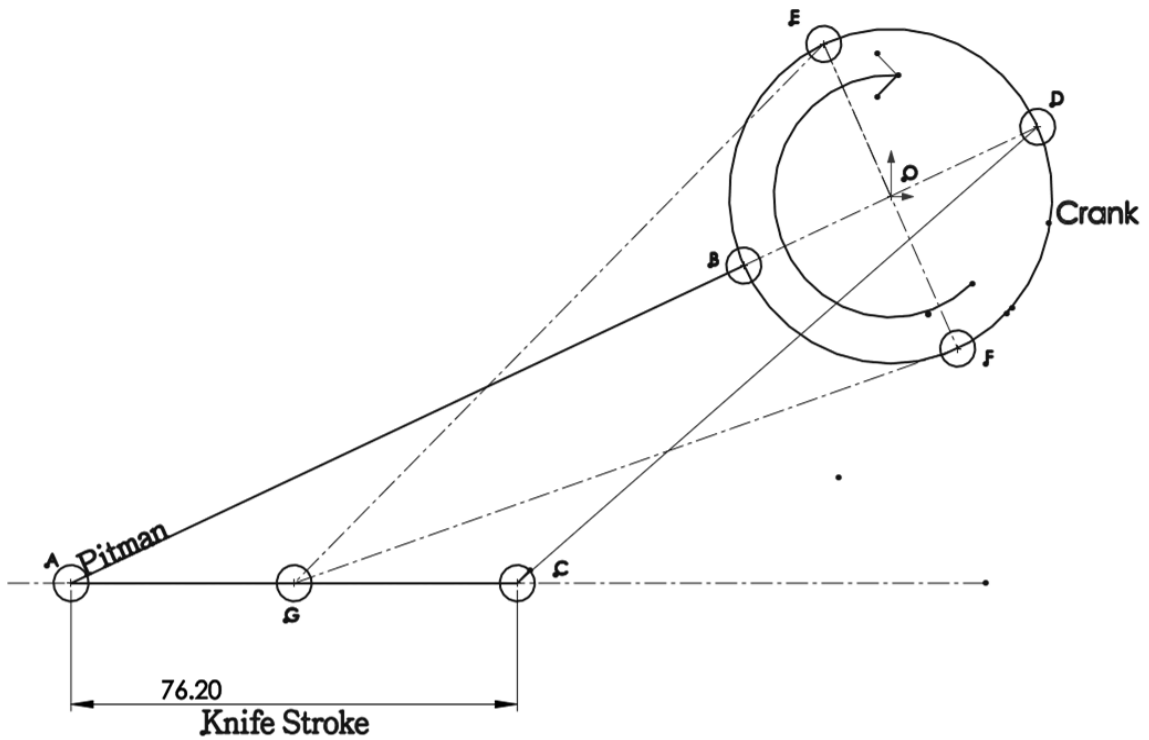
Crank – Pitman motion for standard cutter bar assembly
